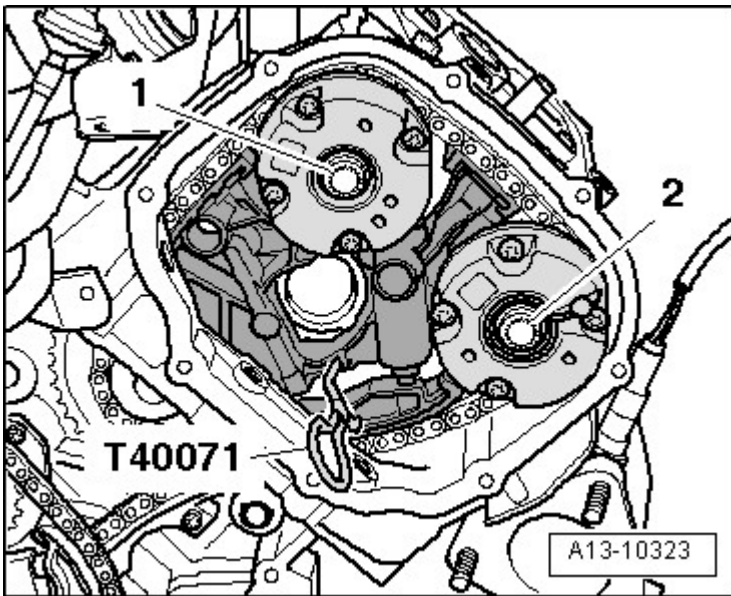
Identifying Bolts On Right Cylinder Head And Removing Both Camshaft Adjusters
